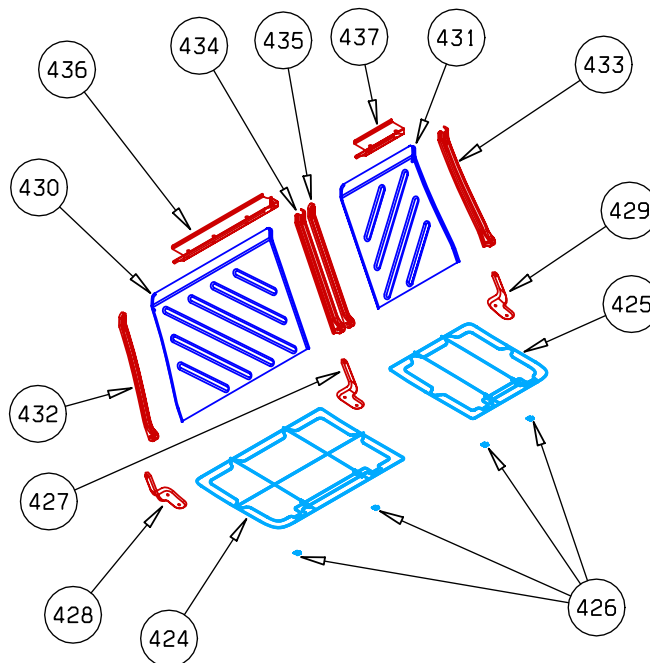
Exploded view Rear Seat structure illustrating steel grade
